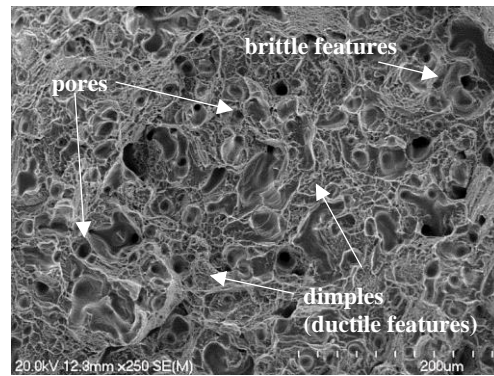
Fracture surface of as-sintered Ti-6Al-4V after tensile failure.
